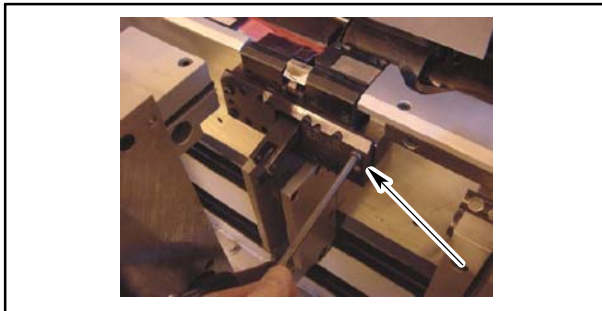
Remove the Mounting Screws for the Cutting Package
